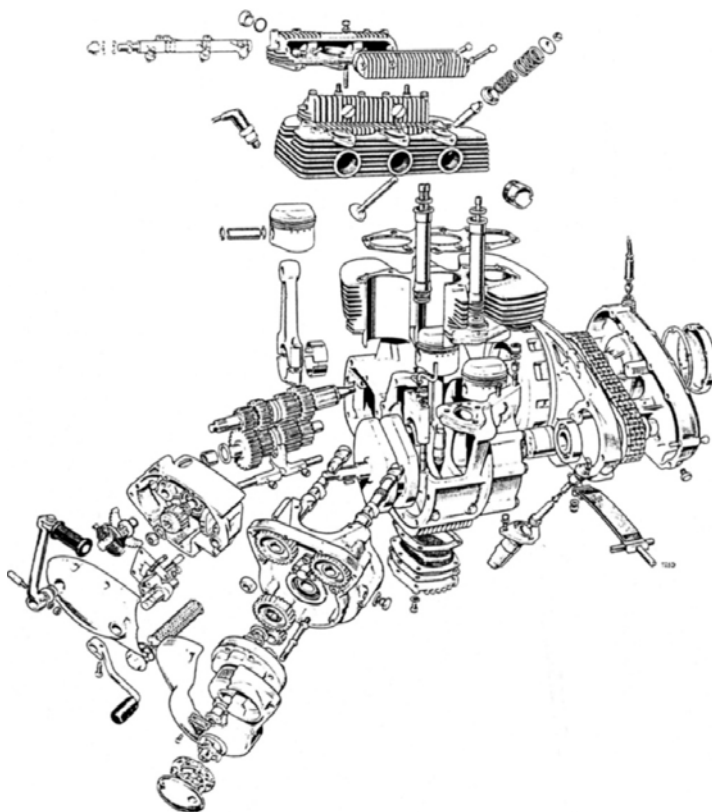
Exploded view of 750 c.c. engine gearbox unit
